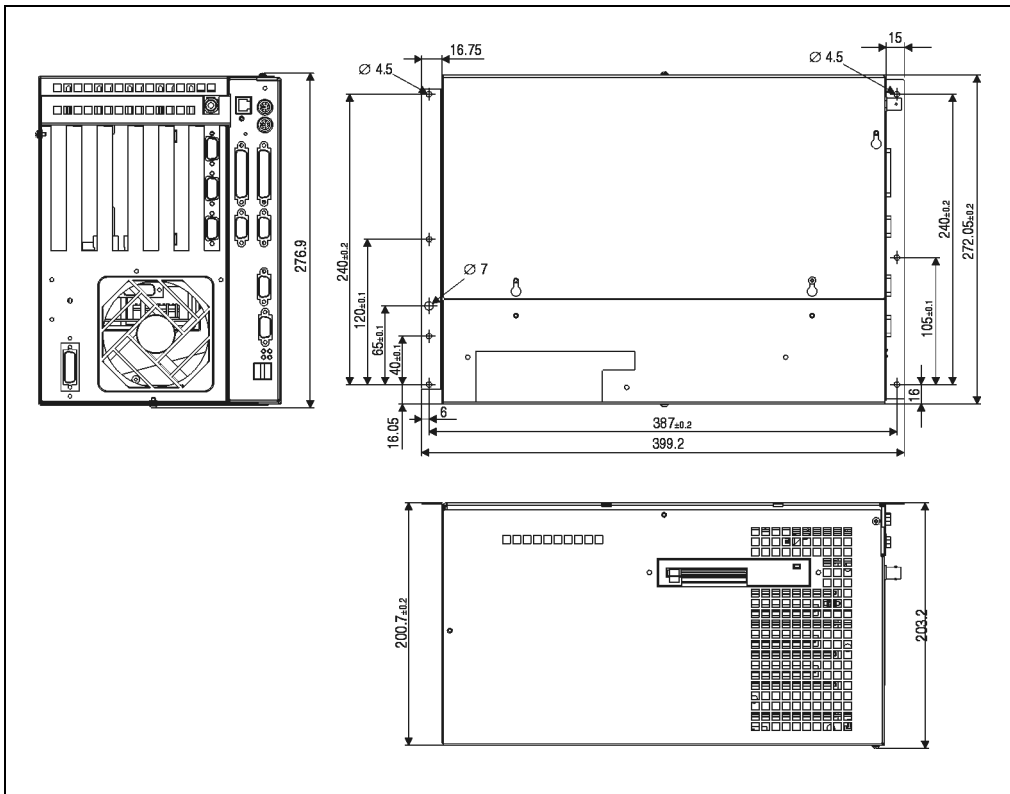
IPC5600 and IPC5600C dimensions (6 slot design)
